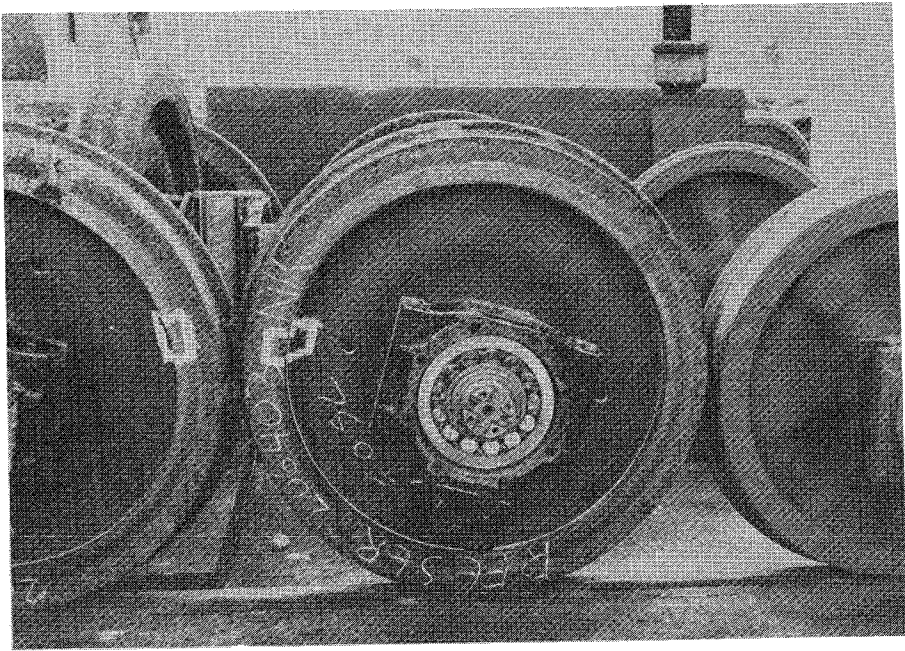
Wheel set with roller-bearing, axle box cover taken off.
